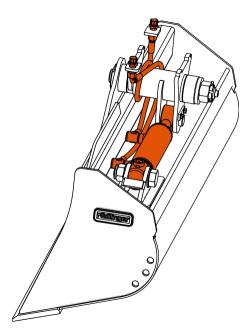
Trench clearing bucket with hydraulic cylinder without bucket holder and rear suspension plate
